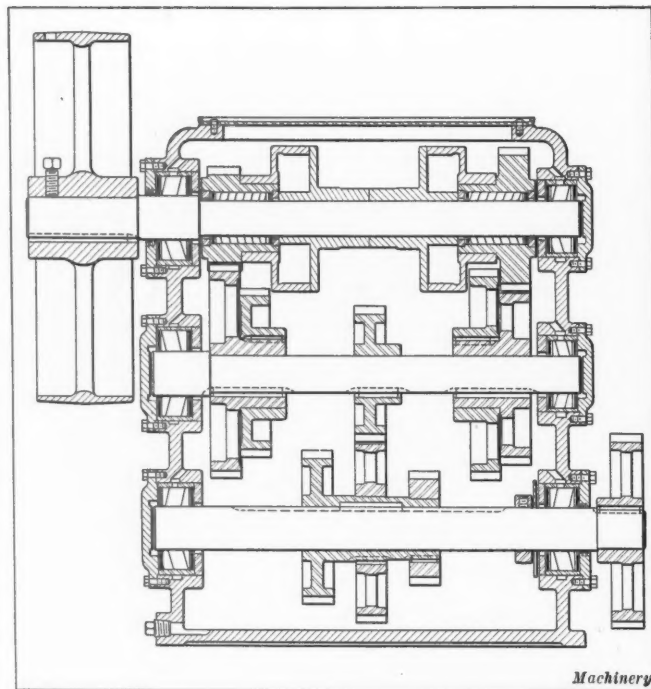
Application of Roller Bearings for carrying All Shafts in a Machine Tool Gear-box. All Bearings directly on Shafts
